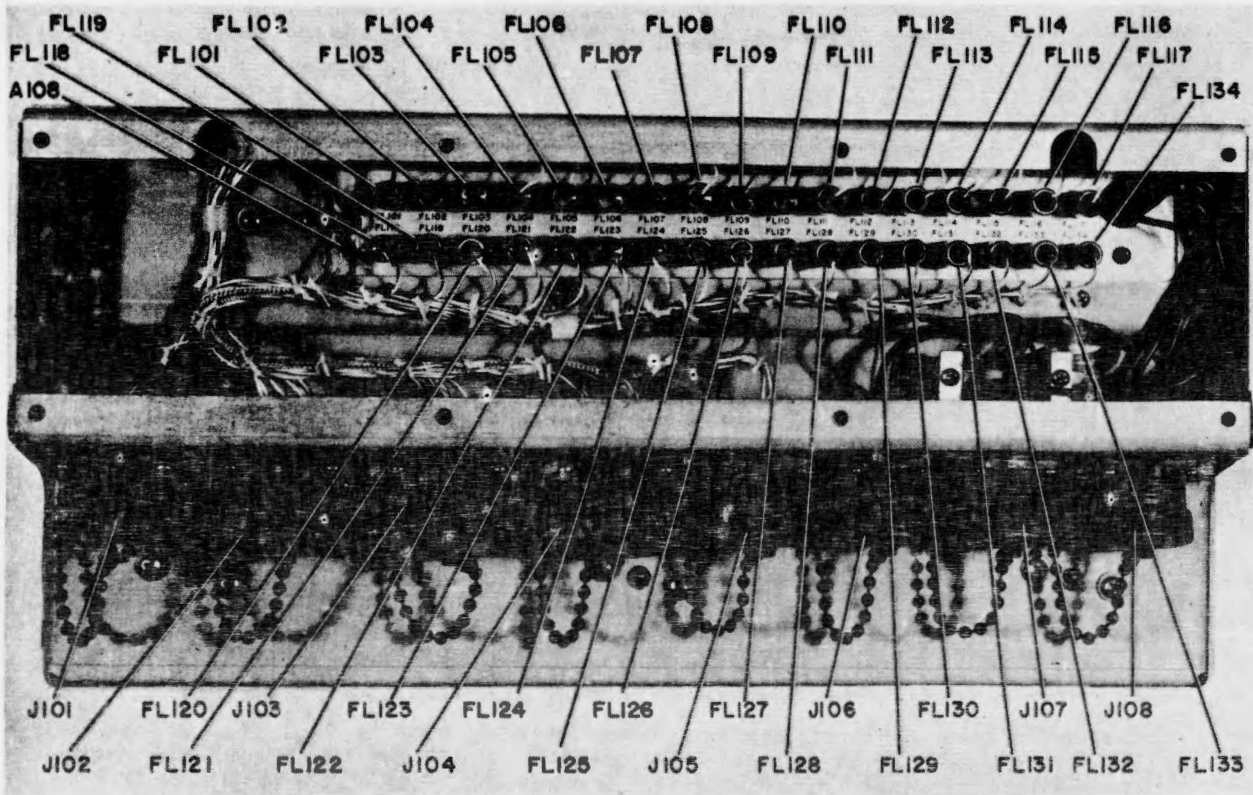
Radio Set Control C-3866/SRC, Rear View, Cover Plate Removed
